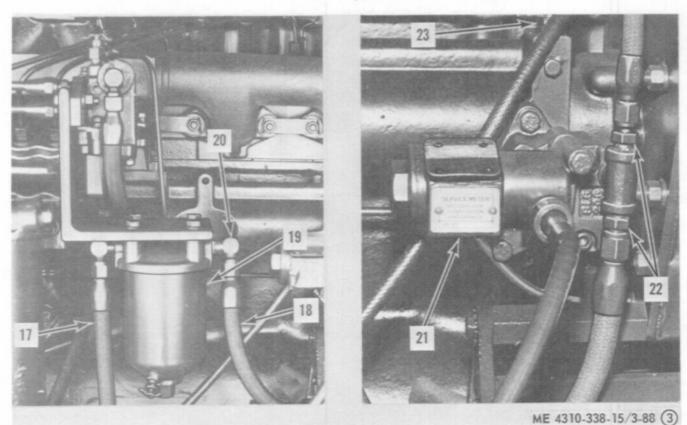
Fuel lines and fittings, removal and installation (sheet 3 of 4).
